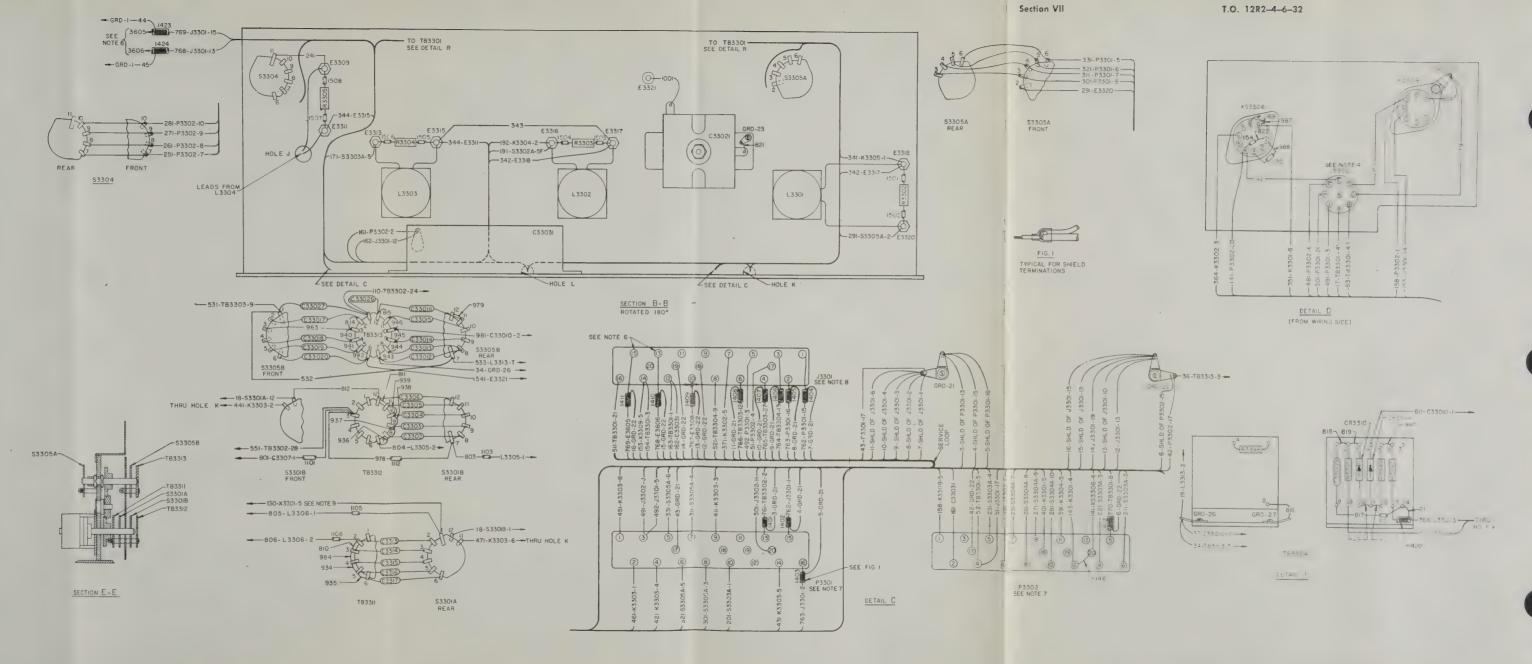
Channelizer Subassembly, Wiring Diagram (Sheet 2 of 5)
